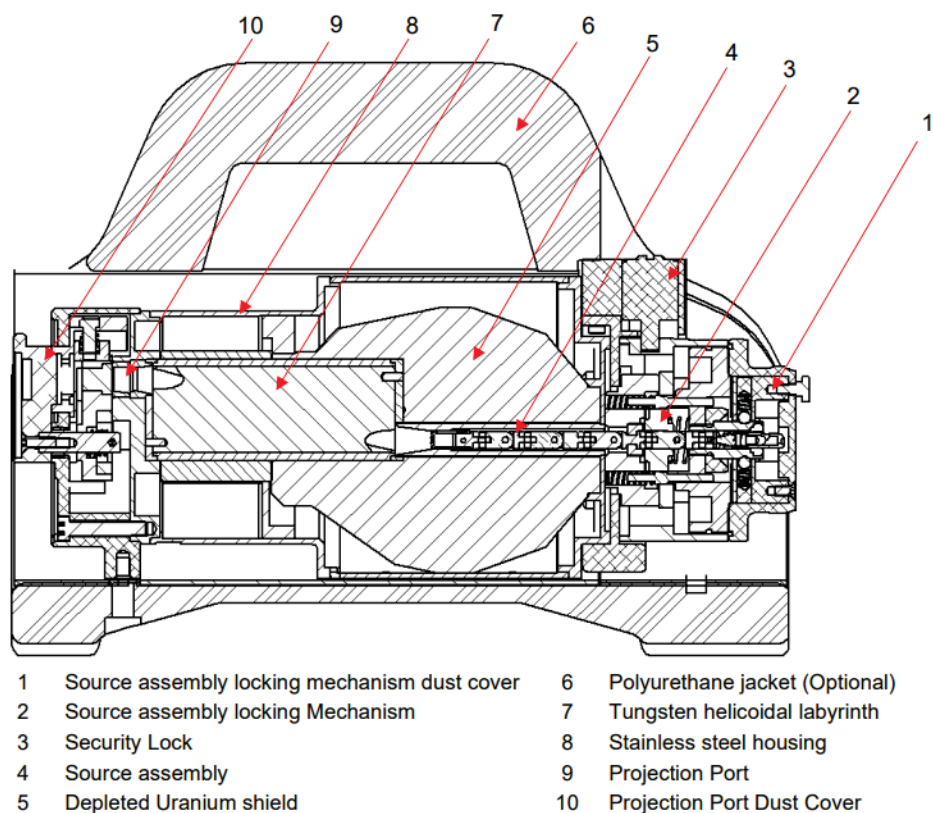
"EXERTUS FORTES" Package Assembly Drawing
